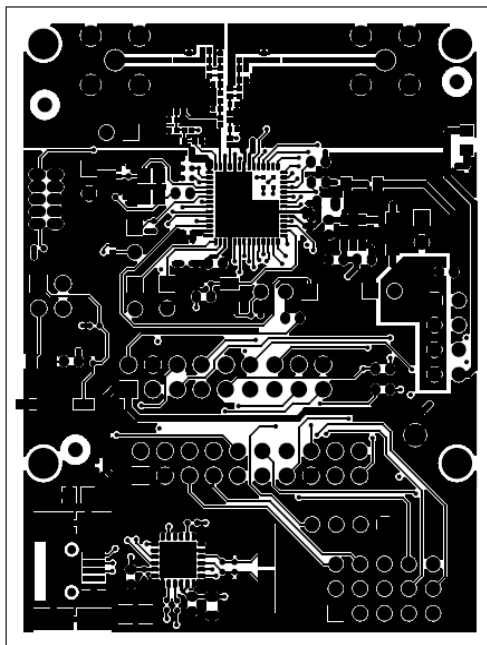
Modular Reference Board PCB Layout (Top View)
